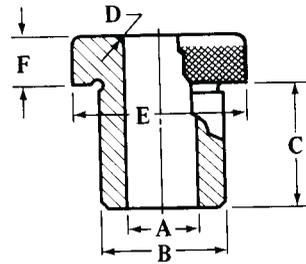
Slip Type Renewable Wearing Bushings — Type S
